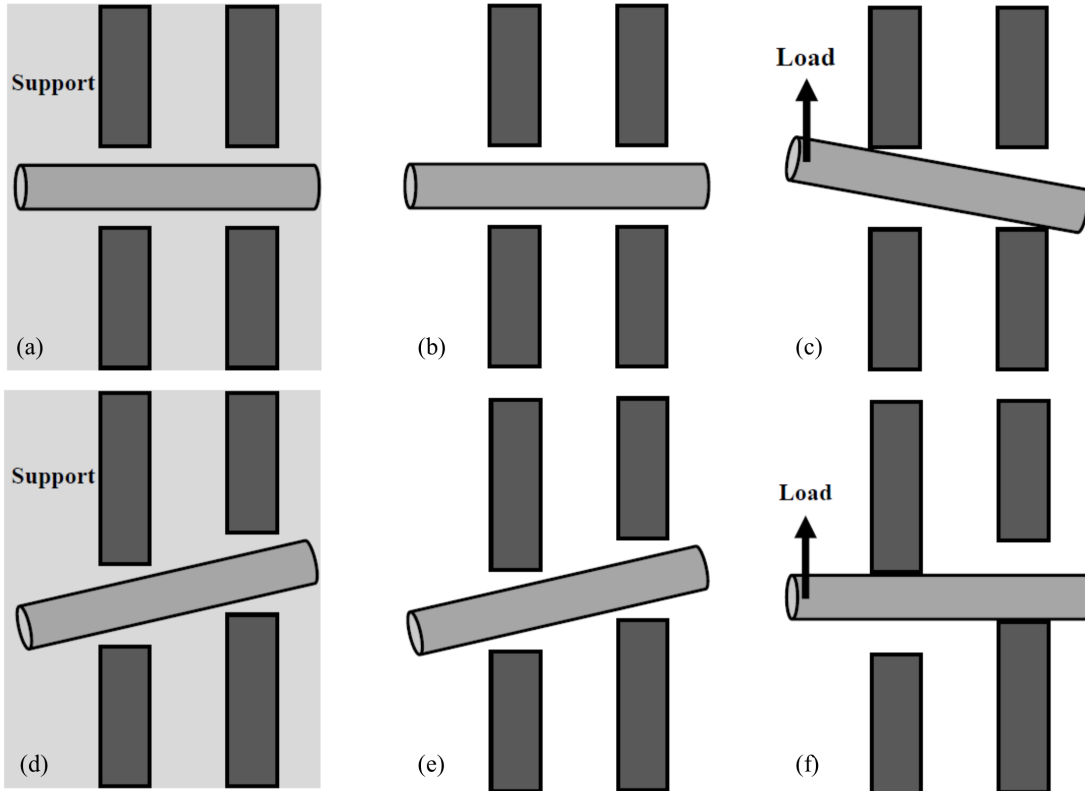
Misalignment caused by large gap requirements:(a) A shaft printed with gaps filled with support material, (b) once support is removed, (c) it will misalign when loaded. (d) Shaft misalignment is pre-compensated for so that (e) when the support material is removed (f) the load will pull it into alignment with close tolerances. More complex compensations need to be carried out for more elaborate mechanisms. Adapted from [44]
